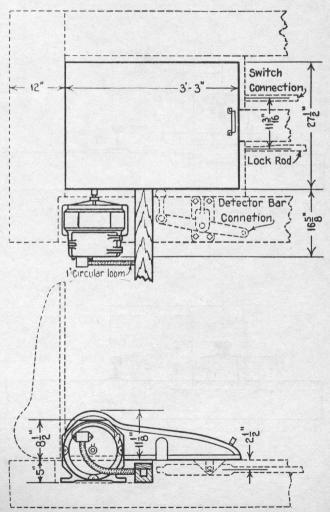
DIMENSIONS OF MODEL 2 SWITCH MACHINE
